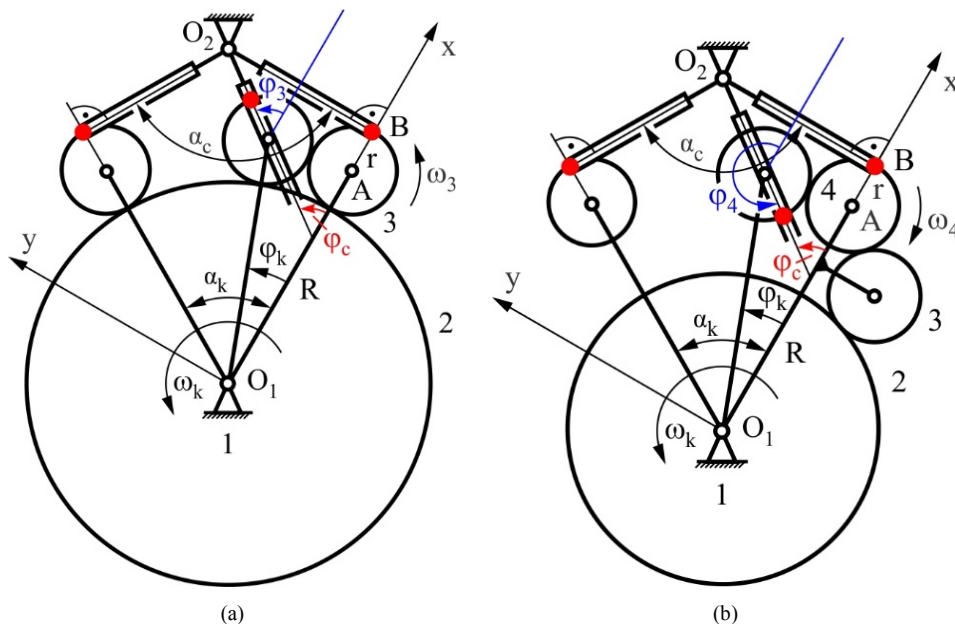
Modified Geneva mechanism a) with one planet gear, b) with two planet gears
